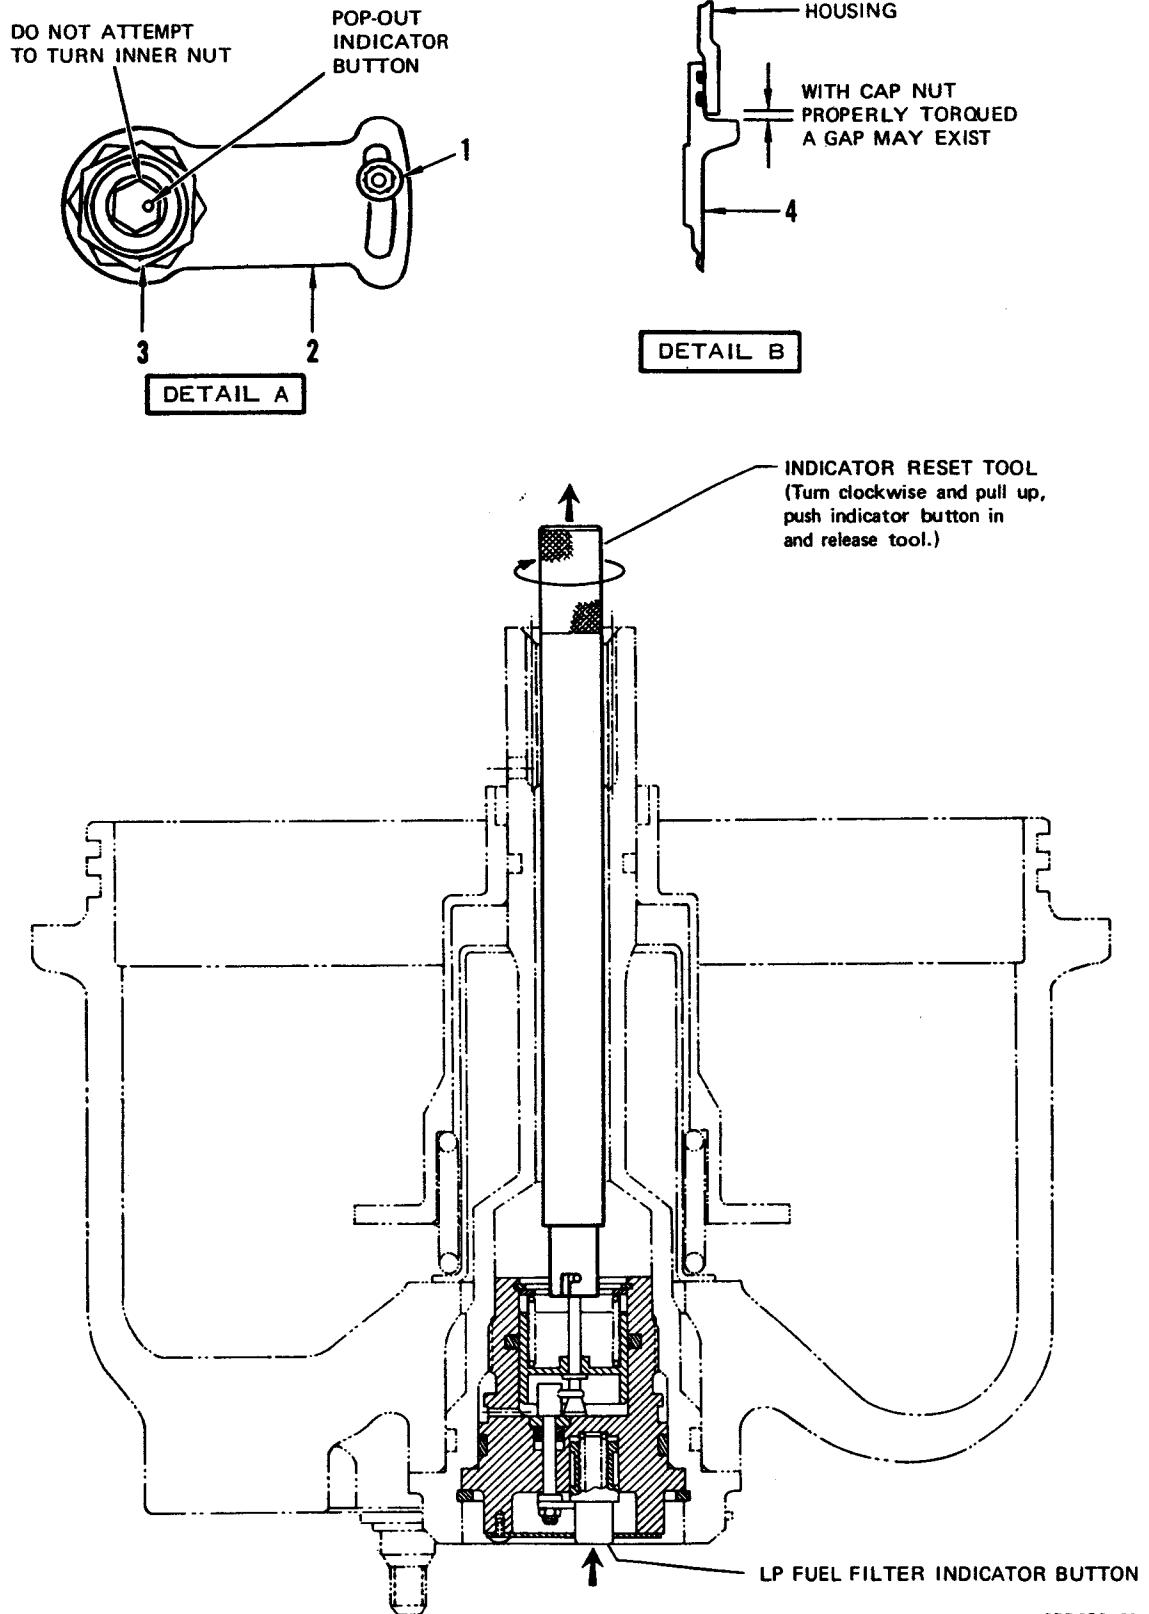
Removal and Installation; Fuel Filter Element (Sheet 2)
